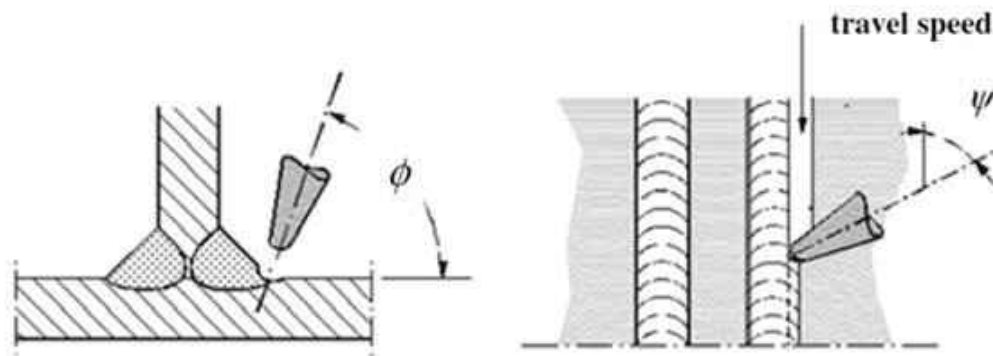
Orientation of HFMI tool with respect to the weld [13]
